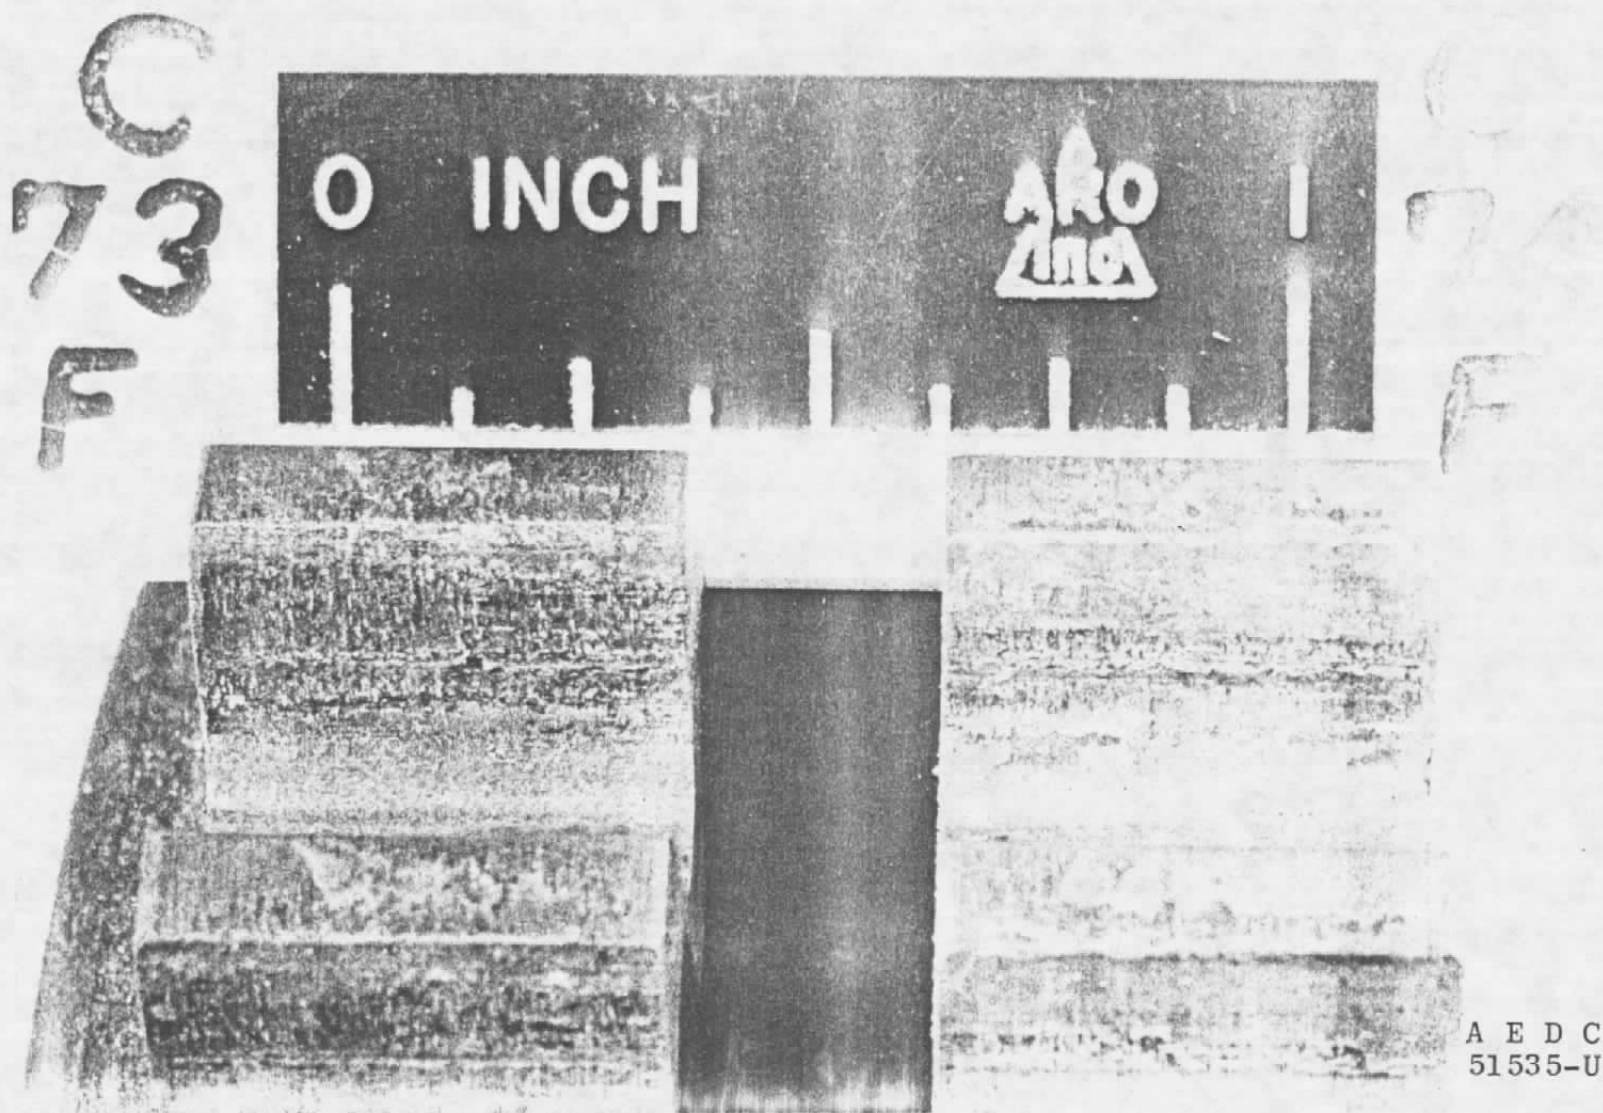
7-D.P. Nodular Iron Gears after 100 hr in Test 4
